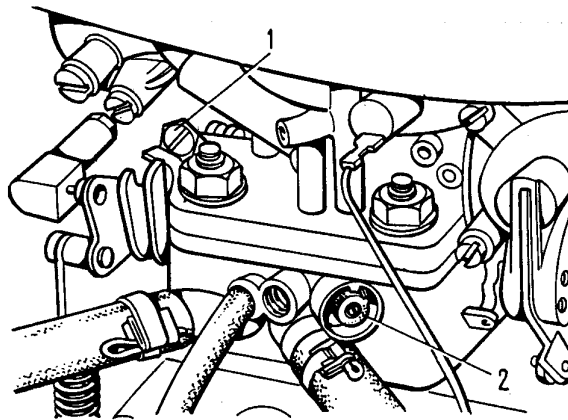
Idling System Adjusting Screws in Carburetors 2106-1107010:
